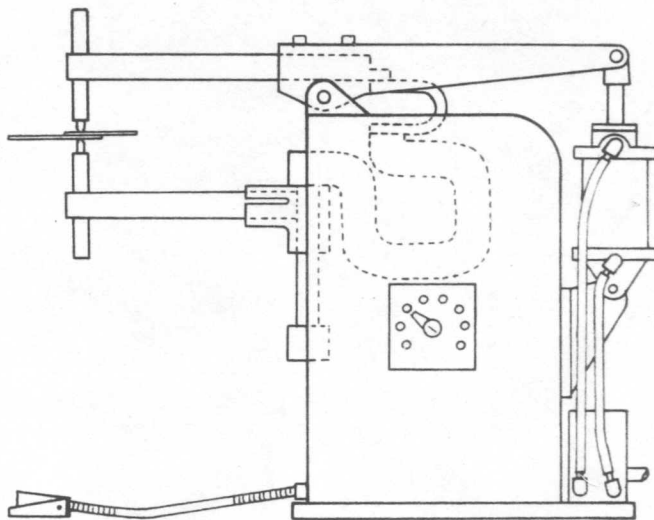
Standard air-operated rocker-arm spot-welding machine. (Redrawn by permission from American Welding Society. *Welding Handbook*, 6th ed., 1970, section 2, p. 28.5.)
